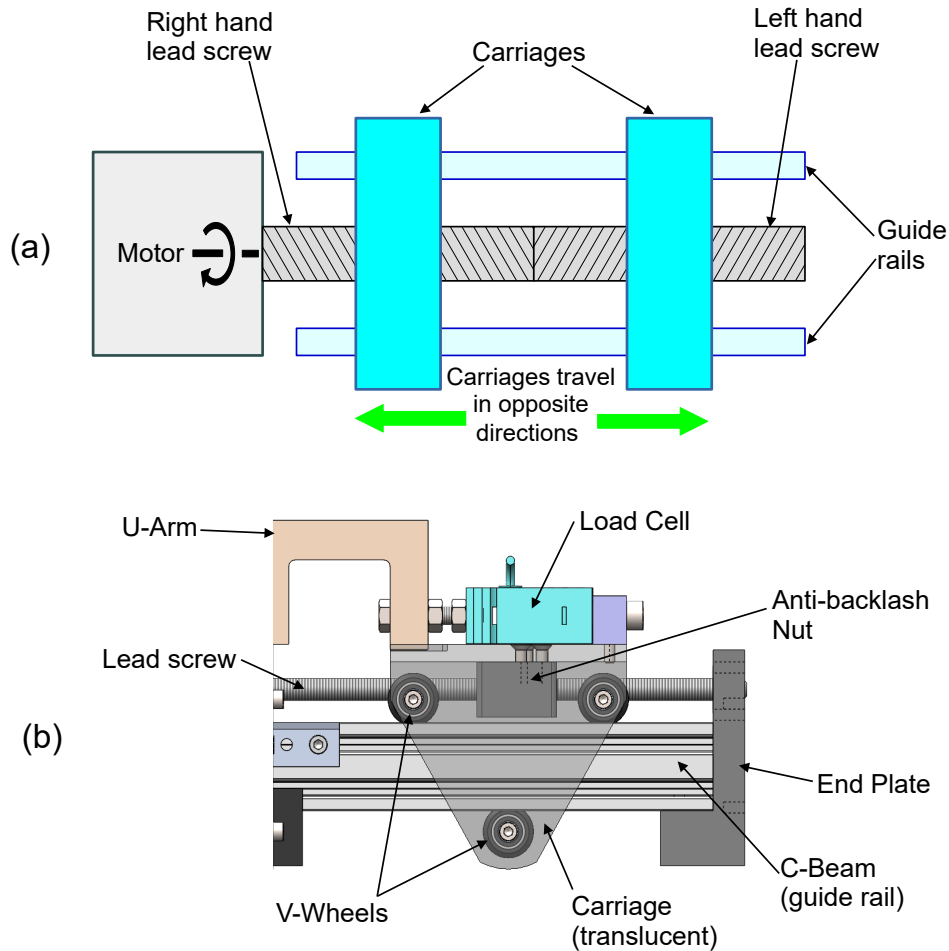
(a) Schematic top view of leadscrew and carriage layout (b) CAD side view of carriage wheel supports
